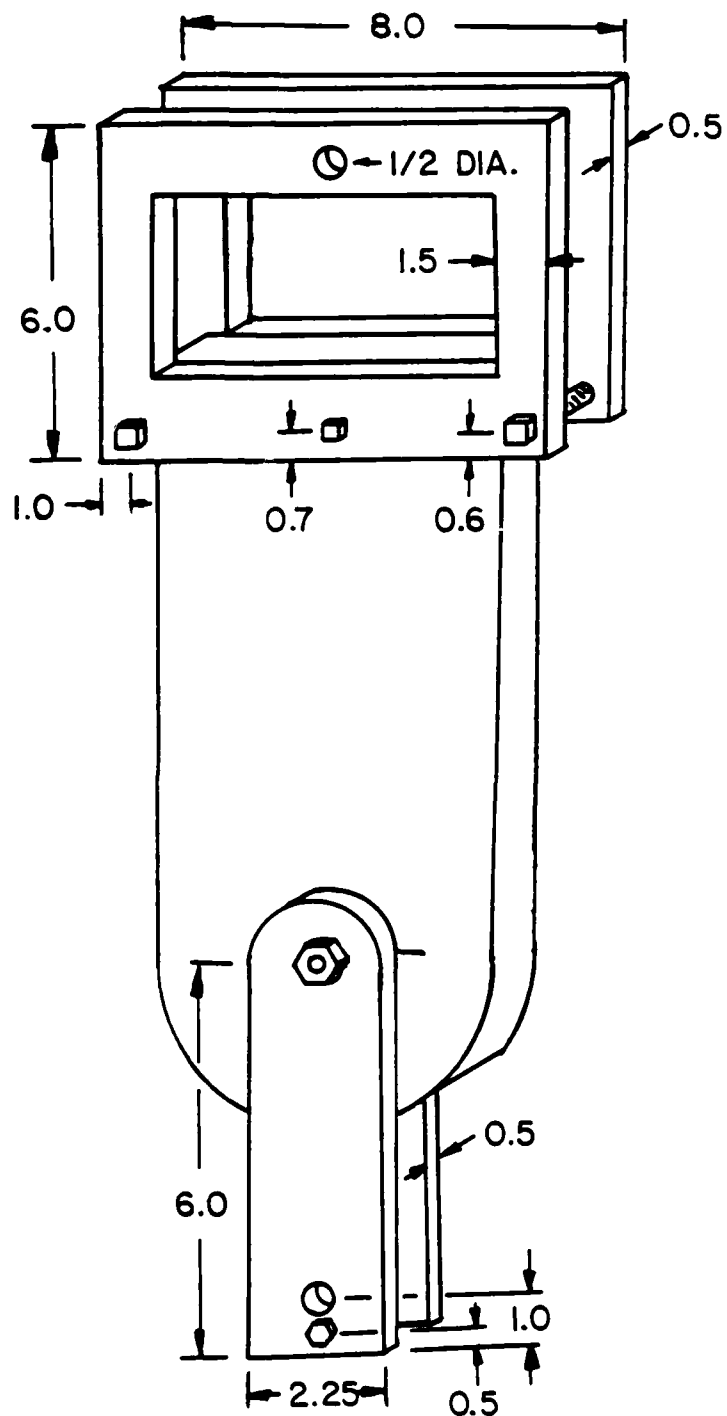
Schematic View of Pin-Loaded Lug Specimen Fastened to the Test Grips (All Dimensions in Inches).
